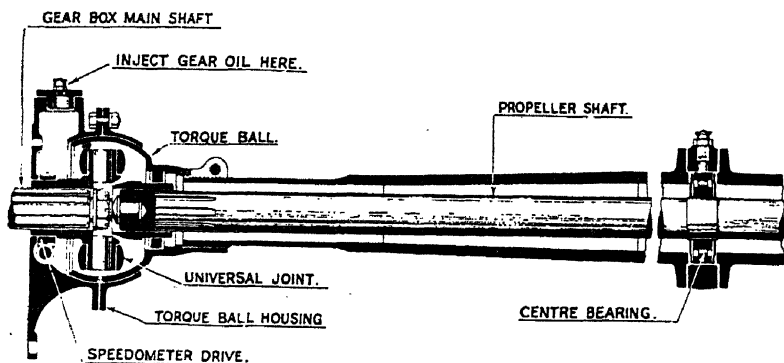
Showing Universal Joint and Intermediate Bearing for Propeller Shaft.
